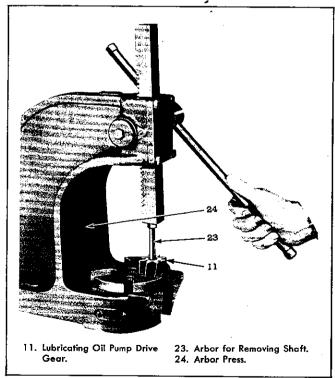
Removing Lubricating Oil Pump Drive Gear from Shaft.
